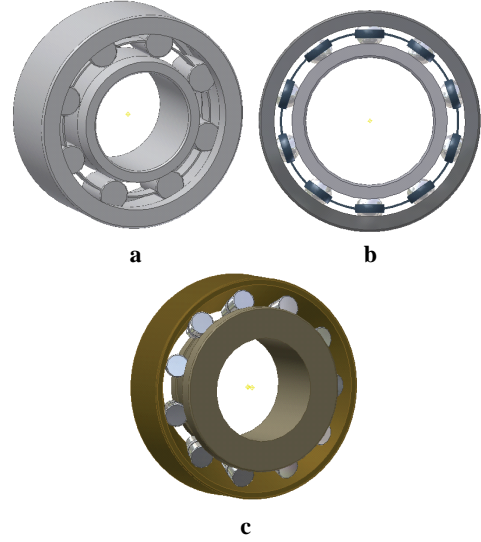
3D MotionInventor models of bearings: *a* – roller bearing; *b* – ball bearing; *c* – conical roller bearing.
